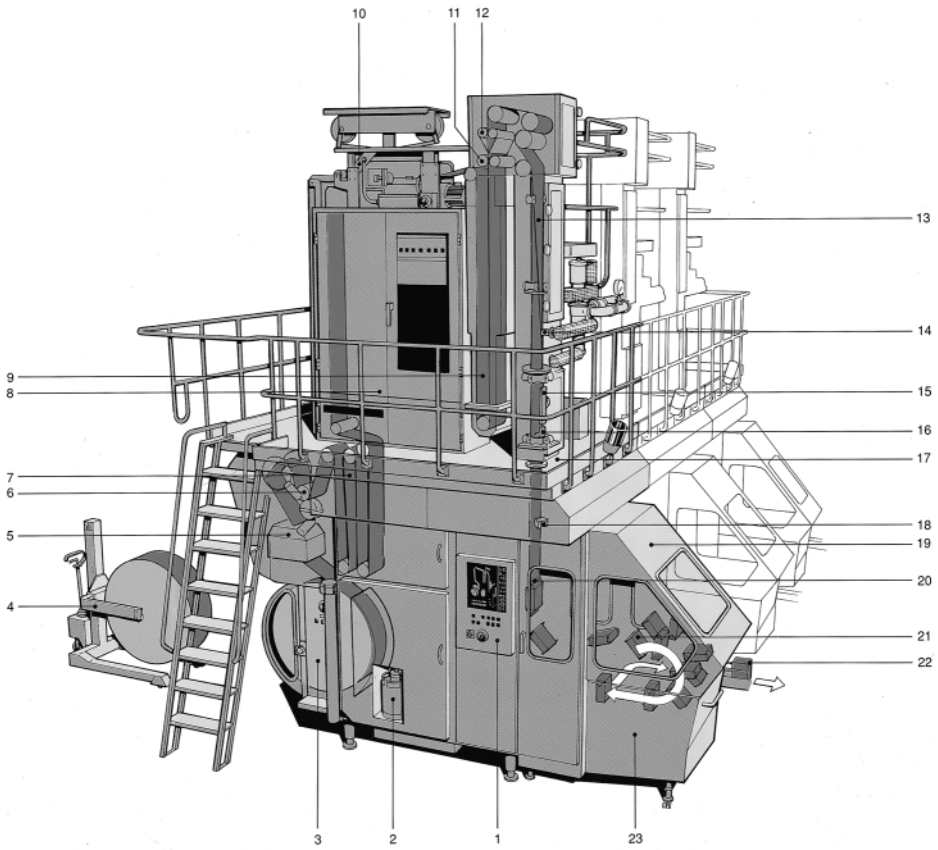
Description of machine operation of form-fill-seal system using the Tetra Pak filling machine
